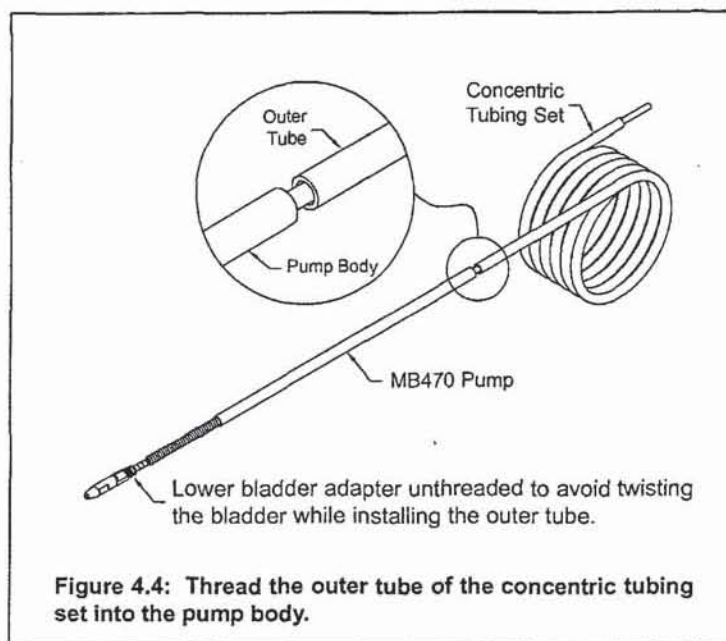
Thread the outer tube of the concentric tubing set into the pump body.
